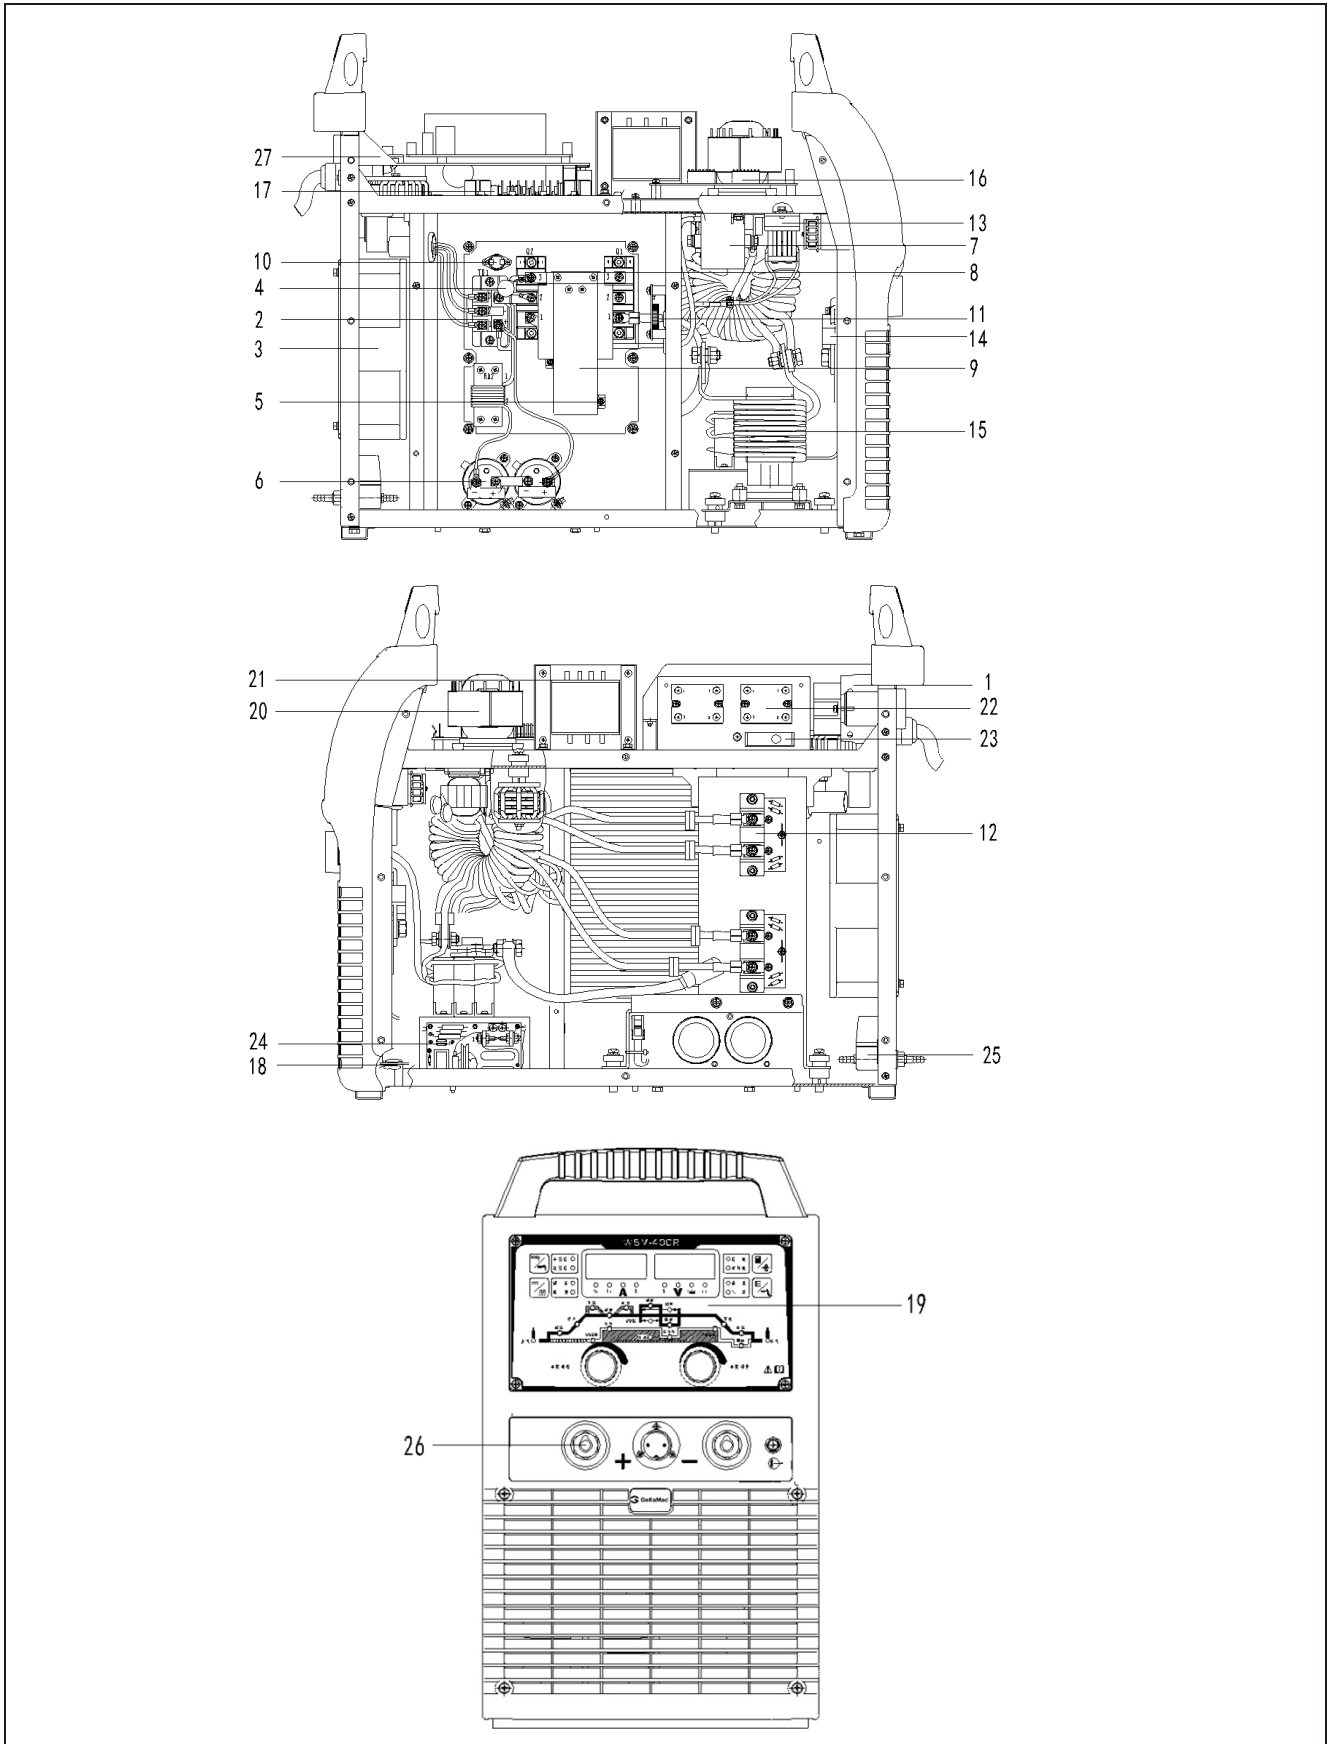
DISASSEMBLY AND REASSEMBLY
